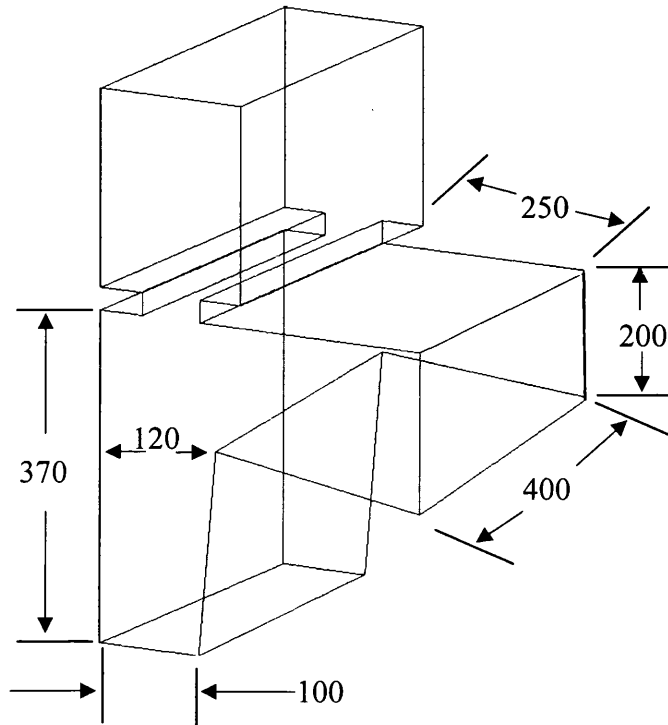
Three-dimensional frame of L-shaped casting showing dimensions in millimeters
